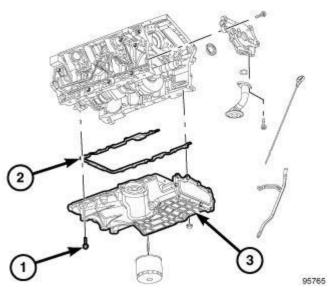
Oil Pan Attaching Fasteners Courtesy of CHRYSLER LLC
